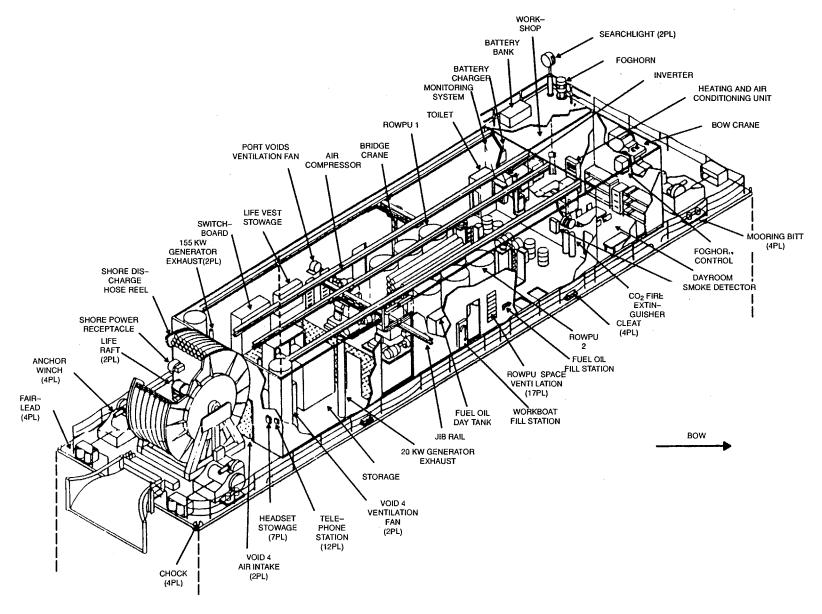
Major Components of ROWPU Barge Systems and Equipment - Deckhouse (Sheet 2 of 3)
